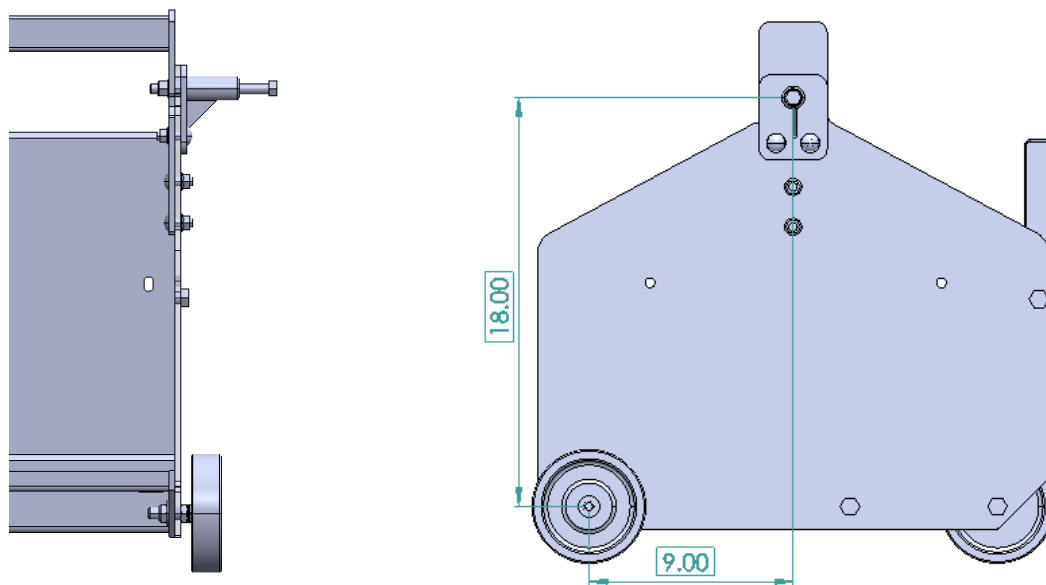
FRONT AND SIDE VIEWS OF SHELF TO SHOW ORIGIN OF DRIVING DESIGN DIMENSIONS.
